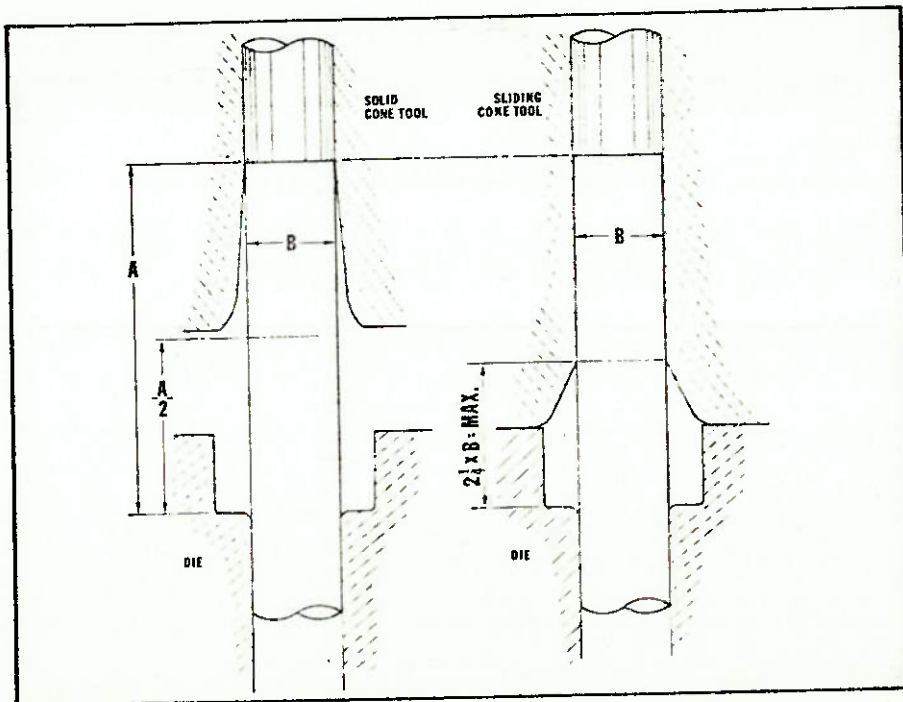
Counterbored die can cause buckle point of unsupported stock to fall close to or outside front end of solid tool (left), resulting in defective upset. This condition can be avoided by using a sliding cone tool, seen at right.
